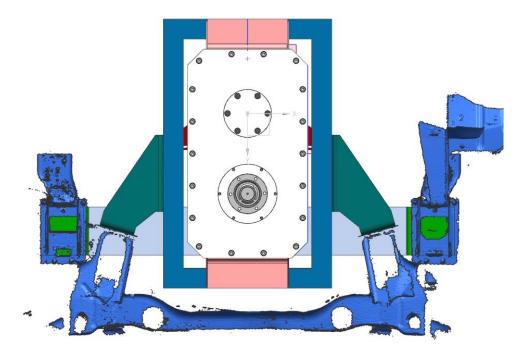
Orthogonal view of the gearbox mounted on the chassis of the vehicle
